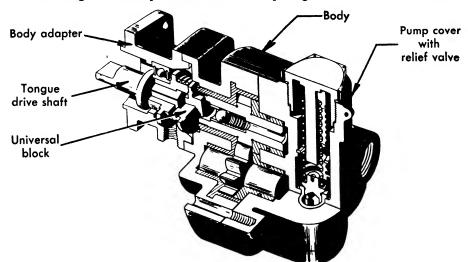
Λ cutaway view of an engine-driven gear pump with integral relief valve. (Courtesy Pesco Products Company)
